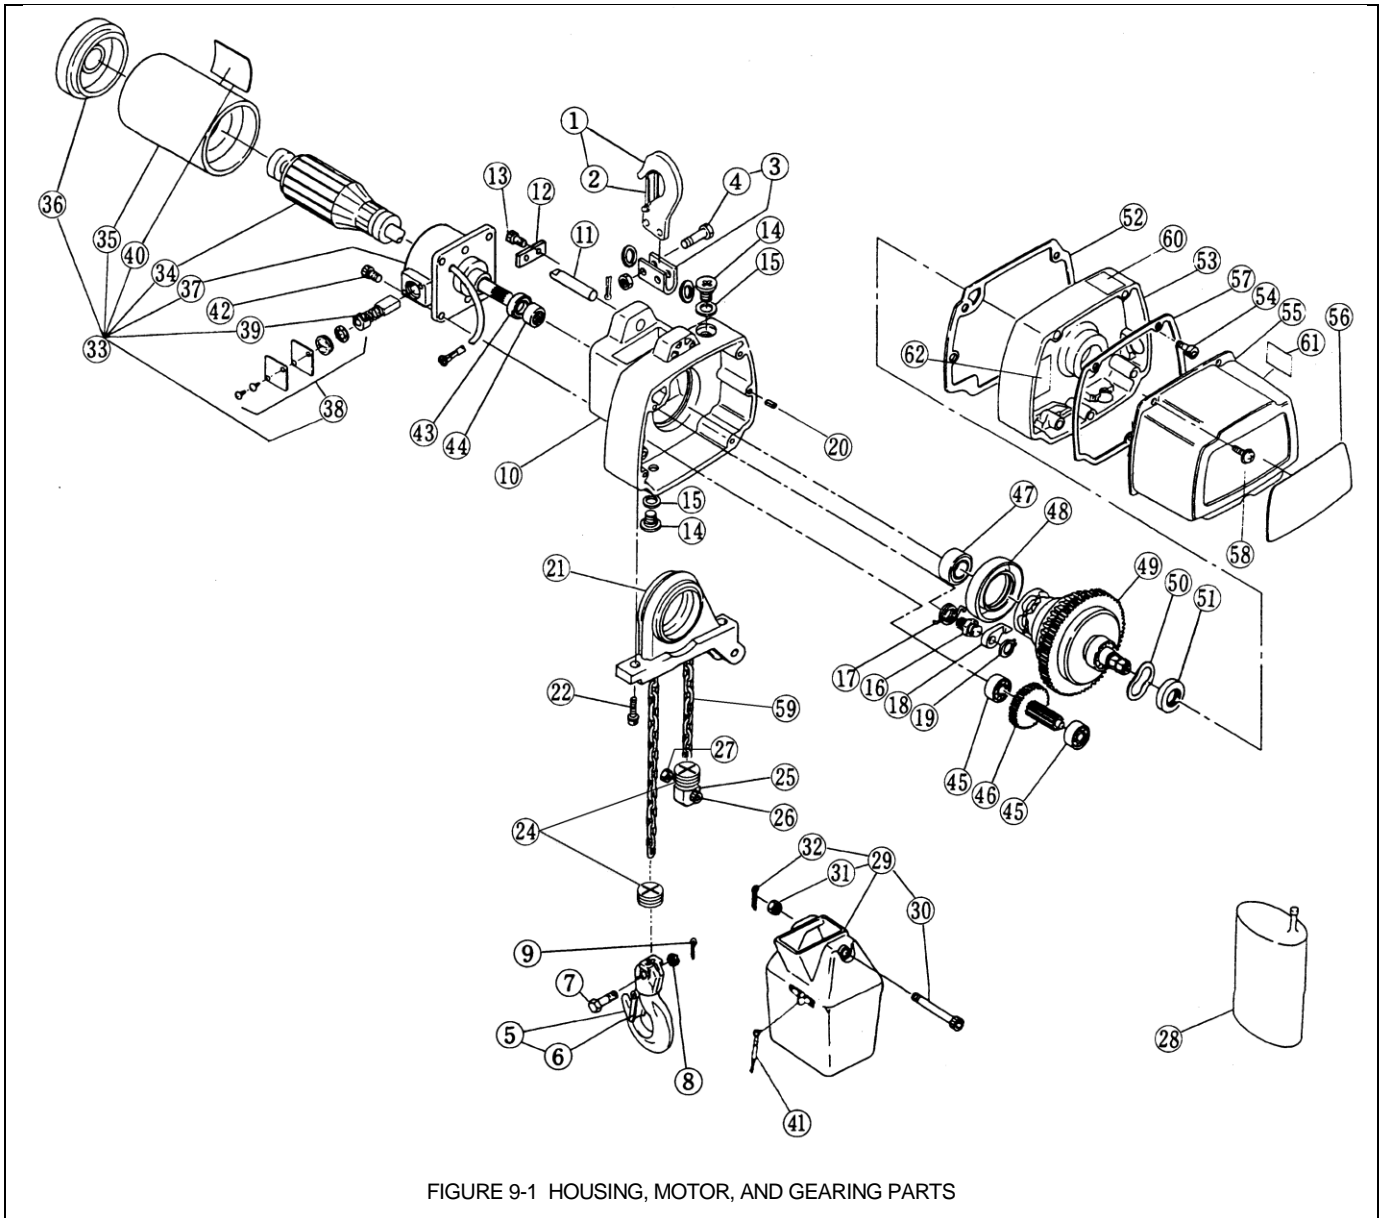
HOUSING, MOTOR, AND GEARING PARTS
